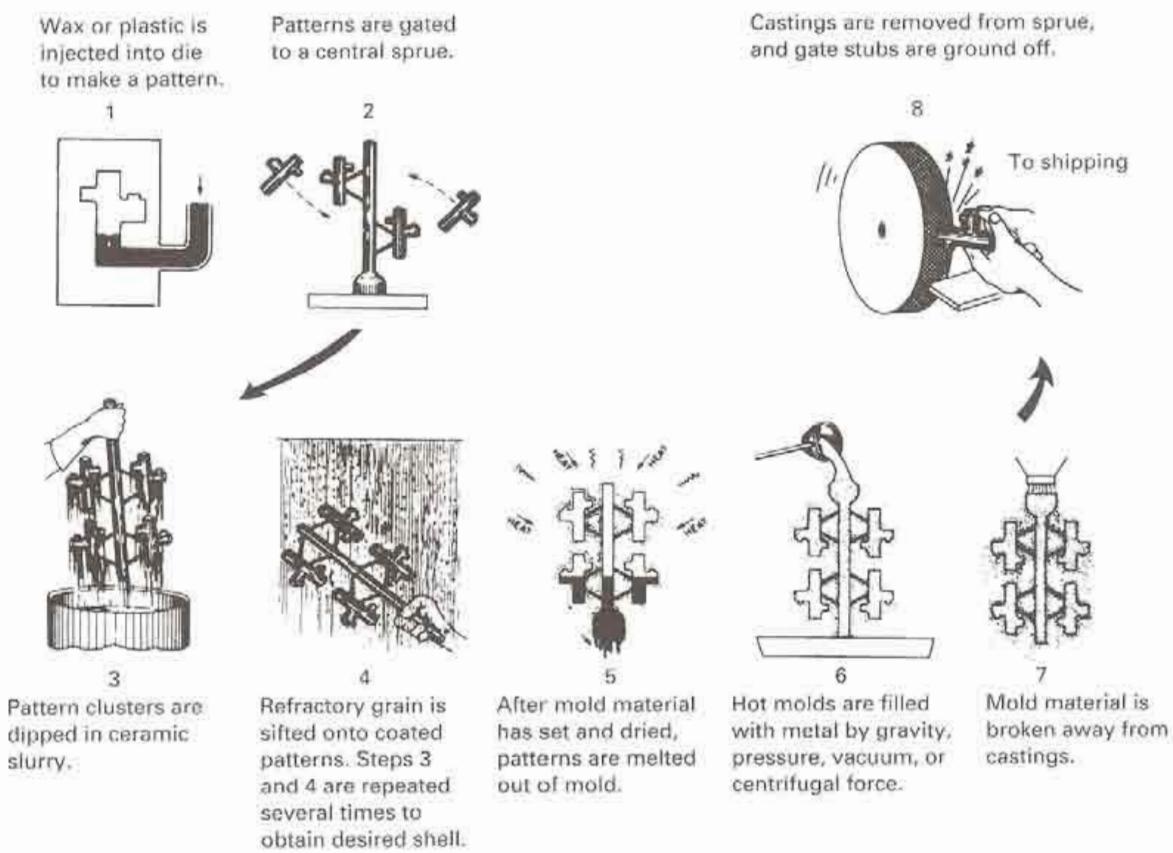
Investment-casting steps for the shell-casting procedure. (Courtesy of Investment Casting Institute, Dallas, TX.)
